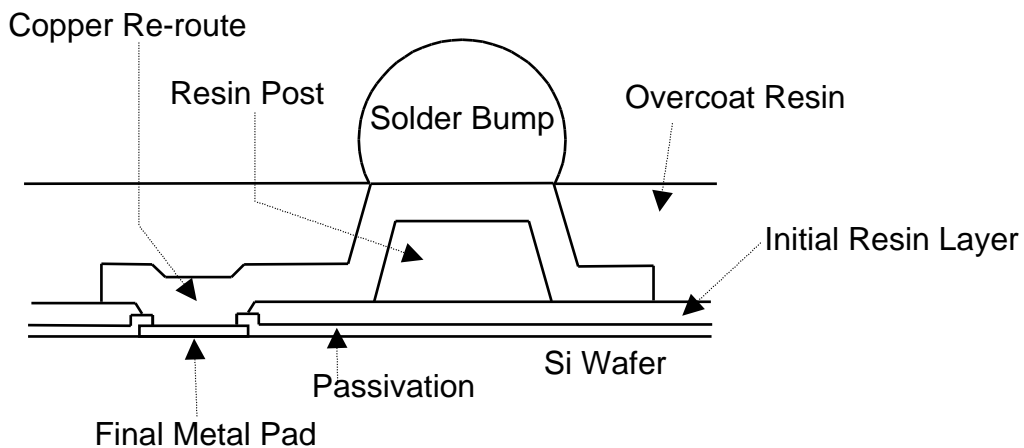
Schematic cross-sectional view of re-routed solder bump on resin post design.
